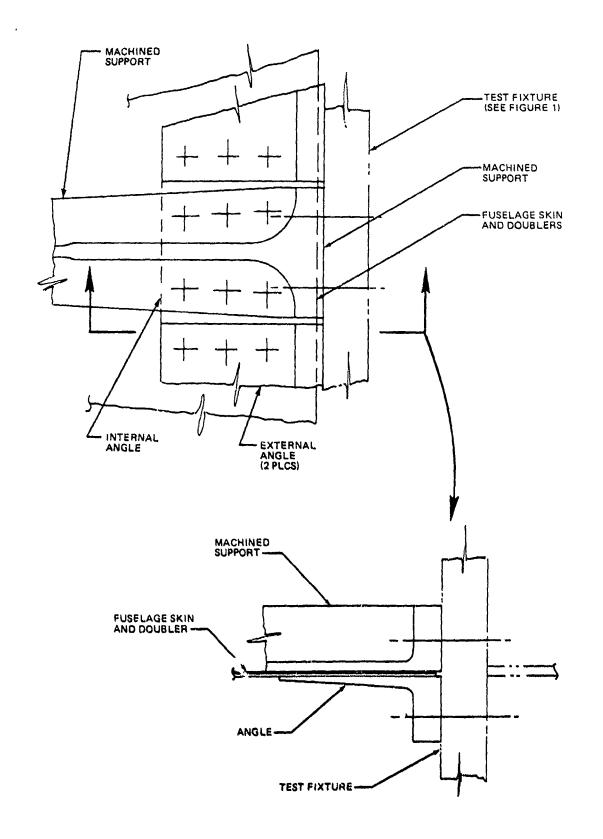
TYPICAL LONGERON TO AFT FIXTURE ATTACH
